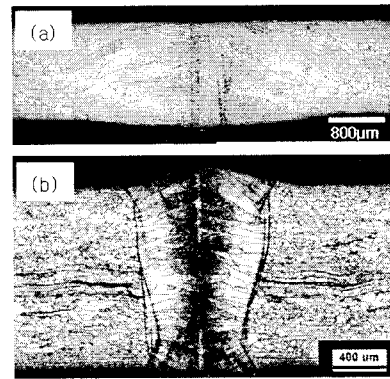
Macrostructures of GTA weld (a) and laser weld (b).
